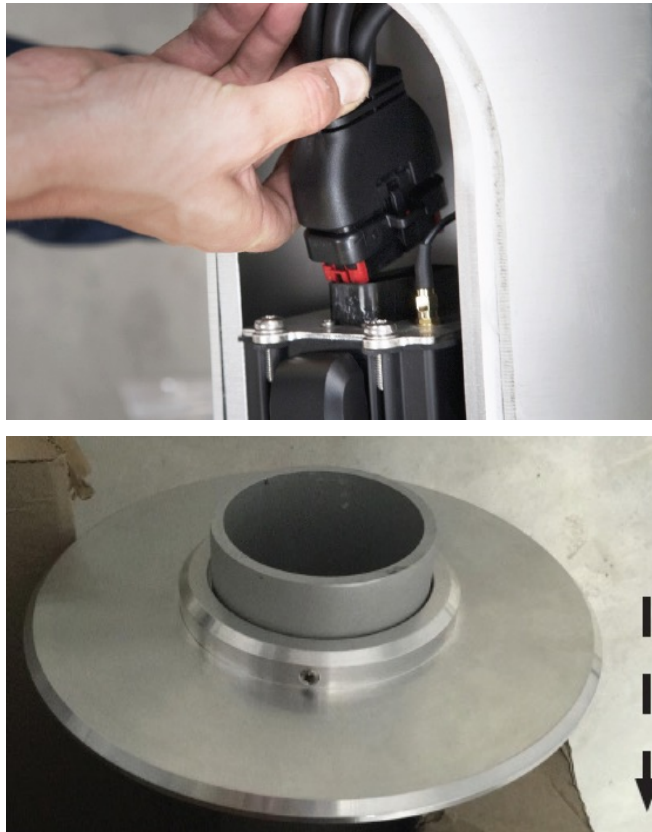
Breakout Cable Connection to Control Unit
